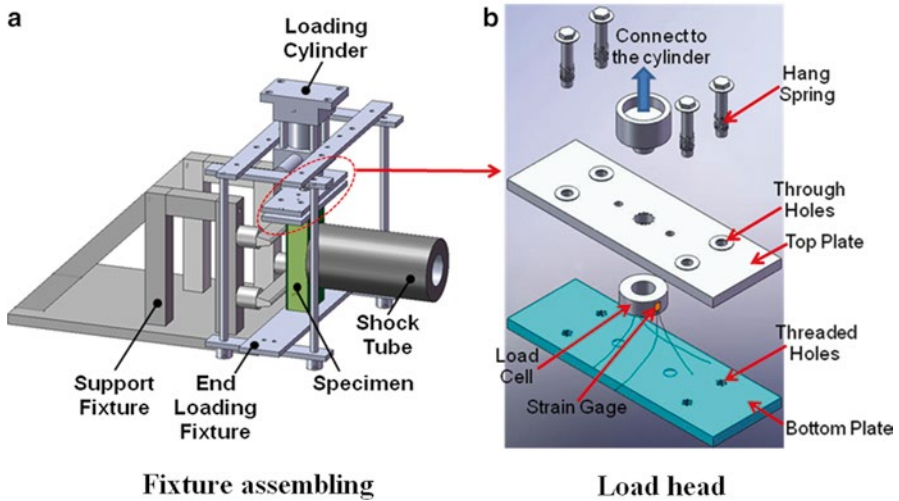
In-plane compressive loading fixture. (a) Fixture assembling. (b) Load head
